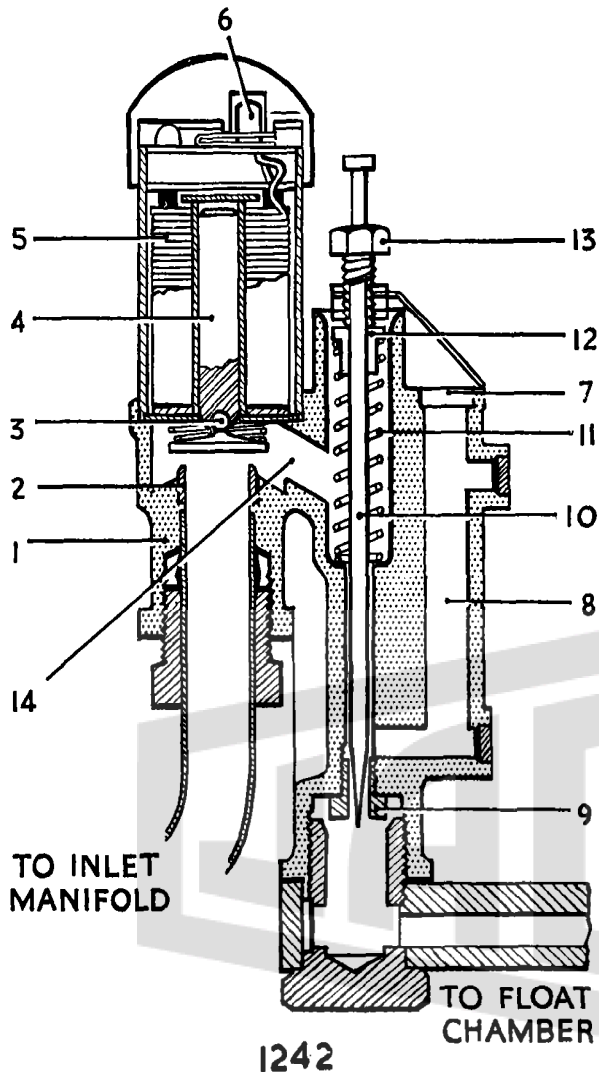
Sectioned view of the auxiliary starting carburetter.
